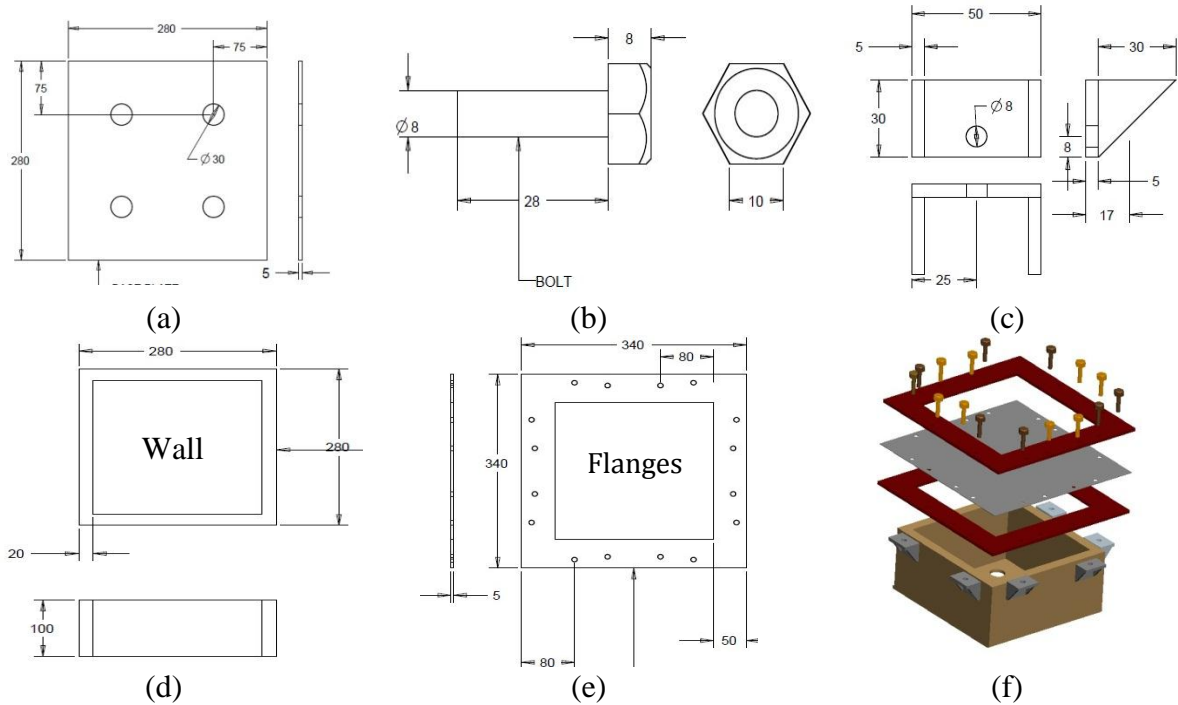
Detail drawing of setup parts (a) base plate, (b) nut bolt, (c) sides hinges to fix flanges with base, (d) wall of setup, (e) flanges used to clamp sheet and (f) CAD model of setup
